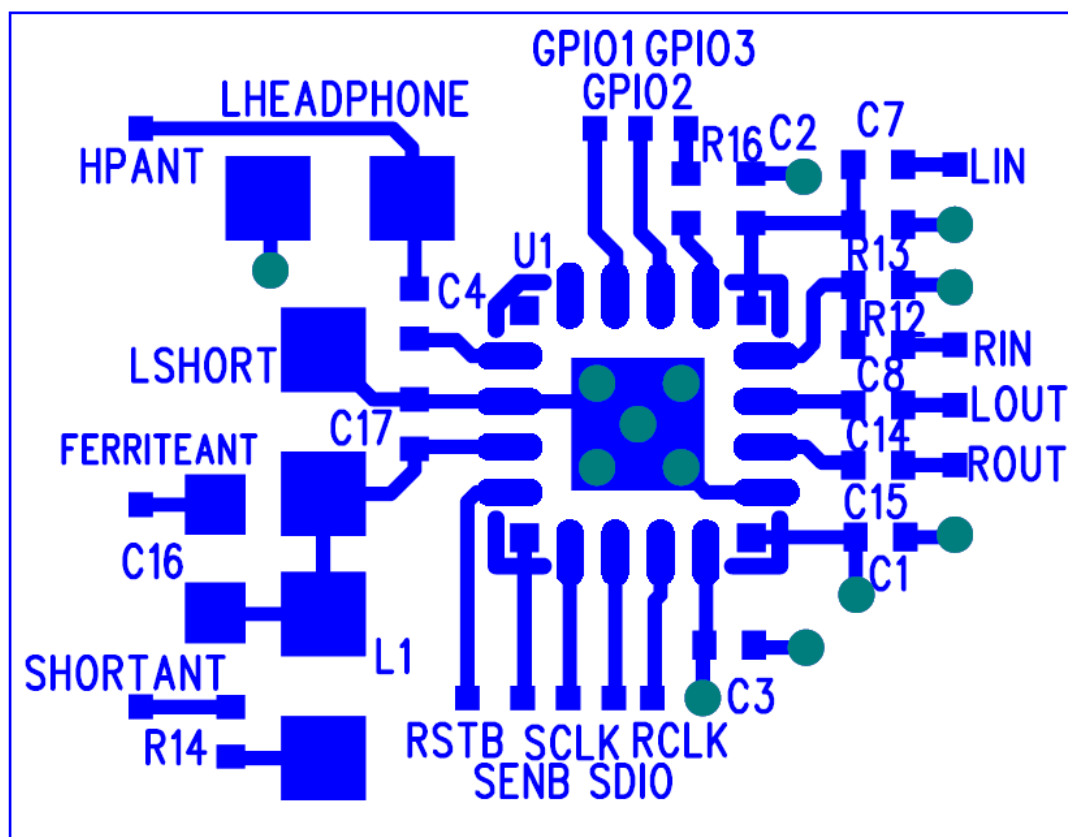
Re-Use Block Layout for Expanded Application Layout (0201 Component Size)
